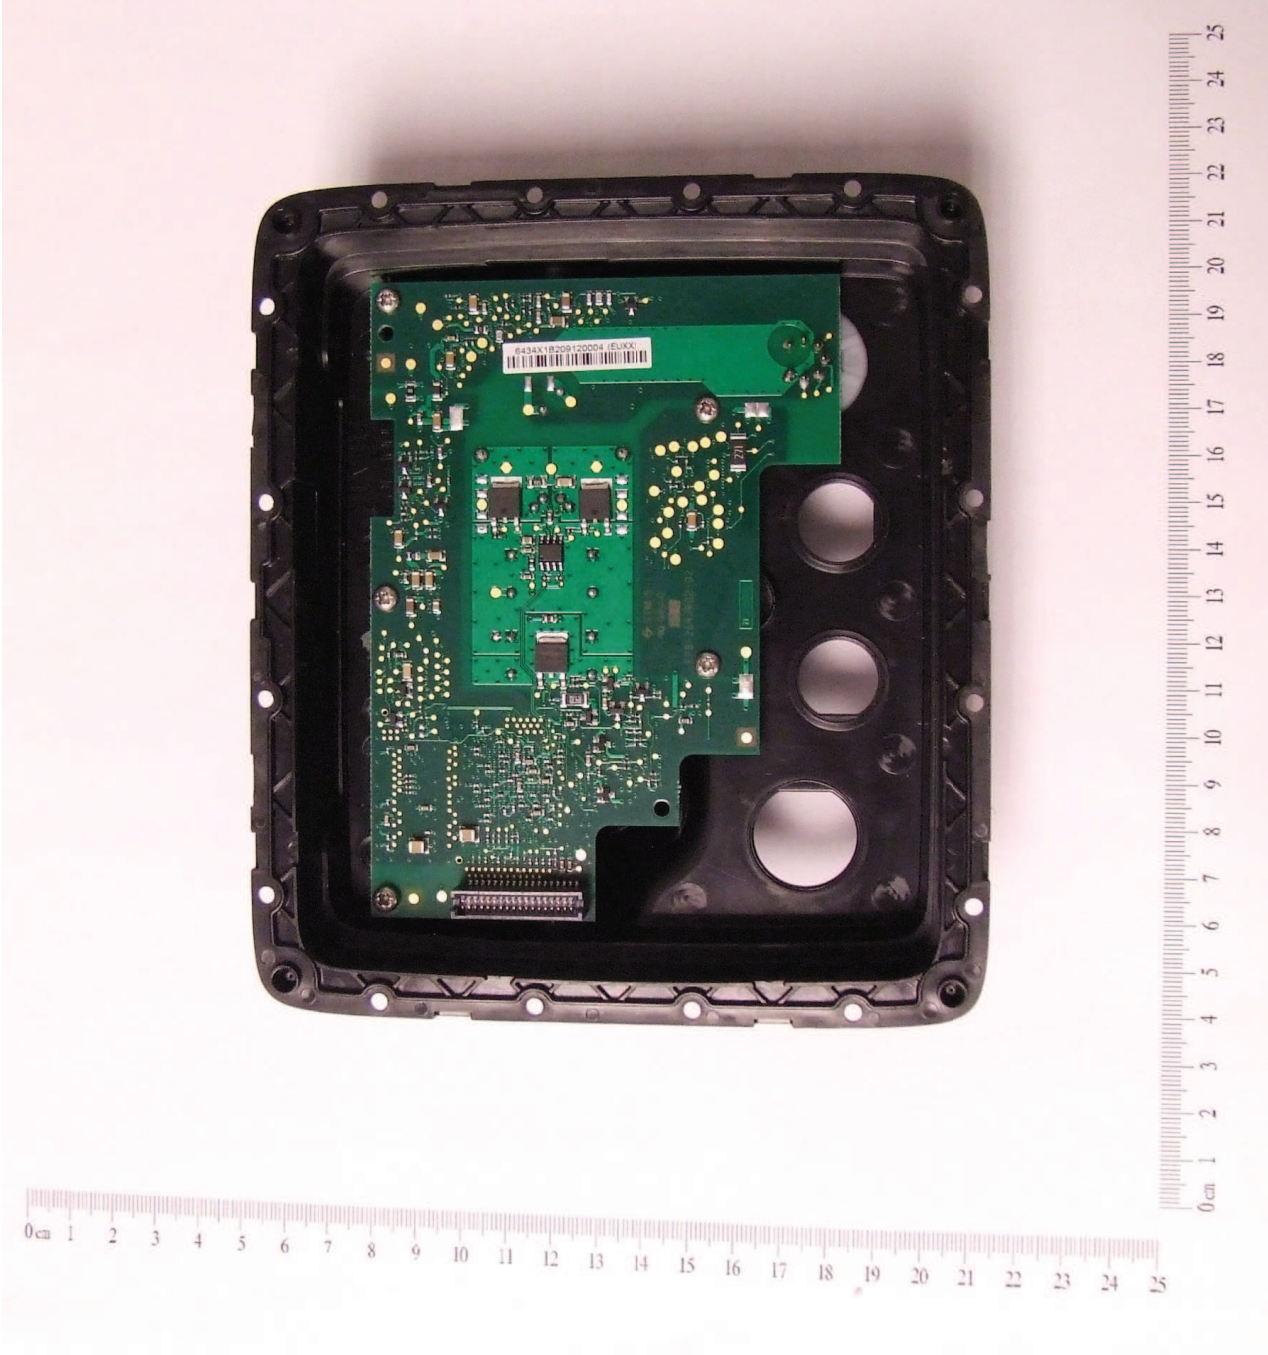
Inside of A6 rear casing showing Sonar PCB (a67 only)
